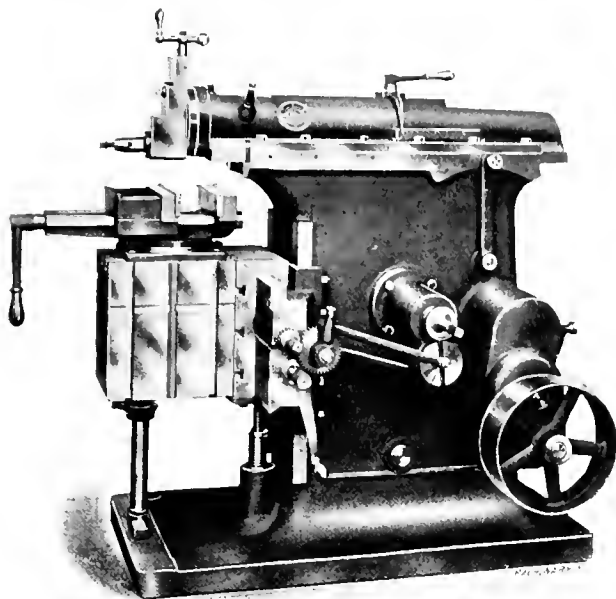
Belt-driven Geared-drive Rockford Shaper.
